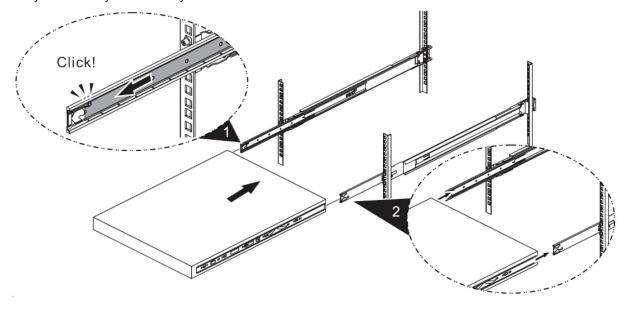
MOUNTING BOXILLA STEPS 4 & 5
